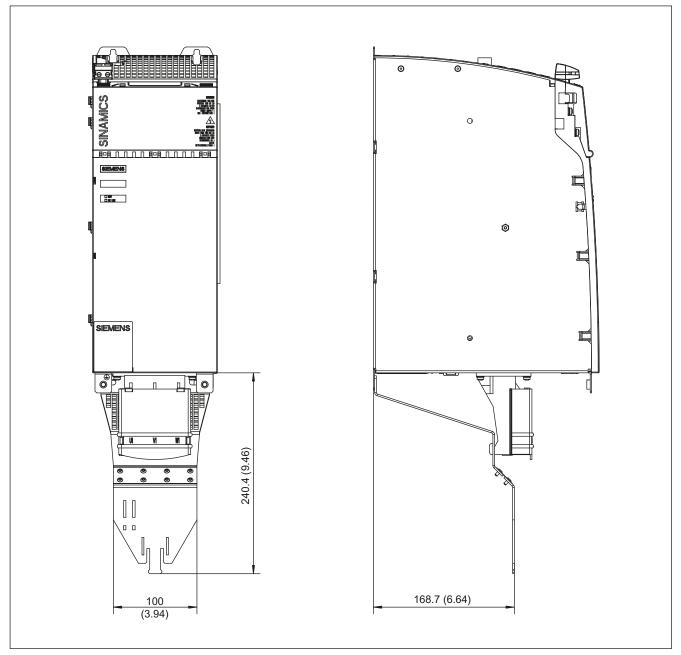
Dimension drawing of shield connecting plate on a 150 mm component with internal air cooling, all dimensions in mm and (inches)
